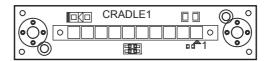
MR-5100RA-2 Daughter Board Component Locations (Top View)
